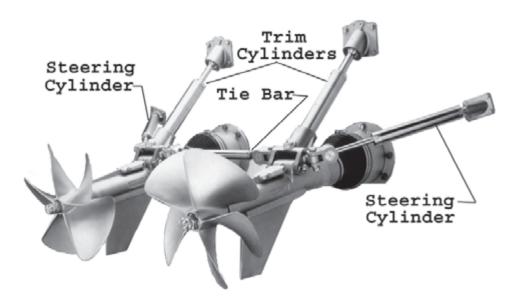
Rear View of Dual Installation Showing Cylinders and Tie Bar
